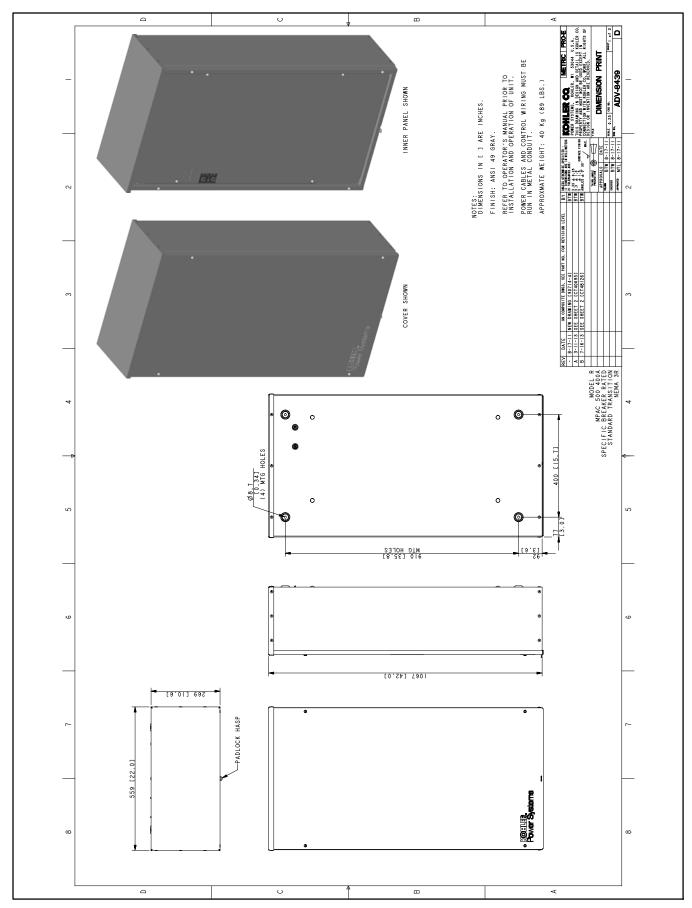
Dimension Drawing, 400 Amp NEMA Type 1 and 3R Enclosure, ADV-8439, Sheet 1 of 2
